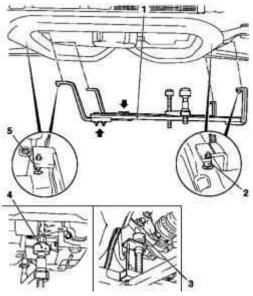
Installation of a special device KM-6001-A on the housing front axle: 1 - a special device, 2, 5 - neck, 3 - rear support 4 - front support
